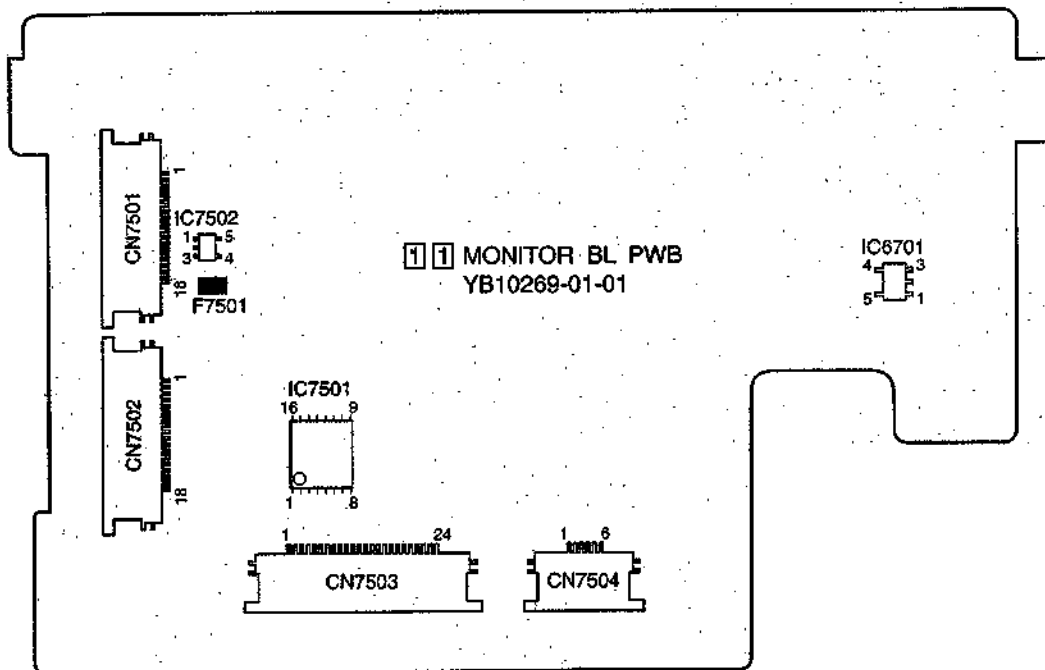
Fuse location MONITOR BL board assembly
